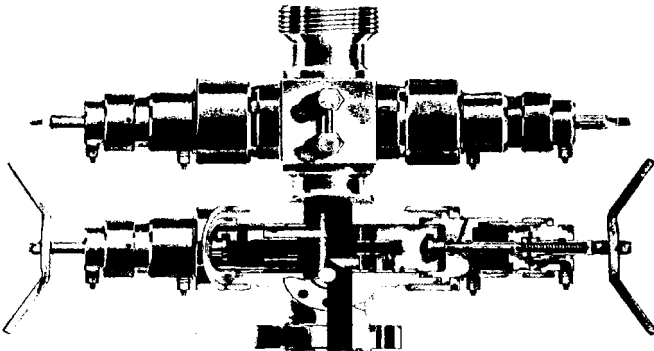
Typical twin ram-type blowout preventer (courtesy of Bowen Tools, Incorporated).
